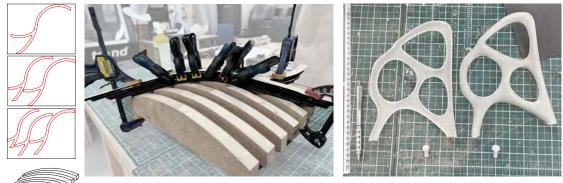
Process Photo, laminating plywood Image 05: 3D Printed Elements
